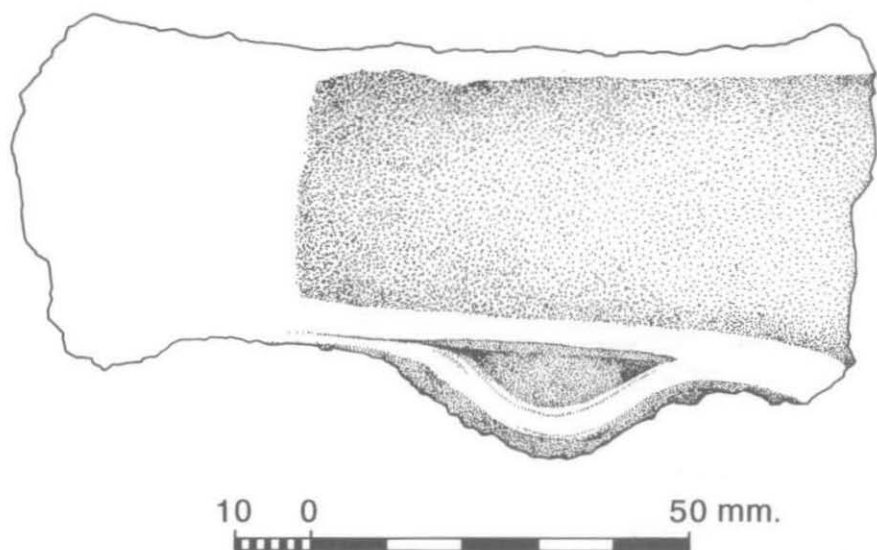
Cross-section through the axehead showing welded loop. (Drawn from X-radiograph by Paul Hughes.)
